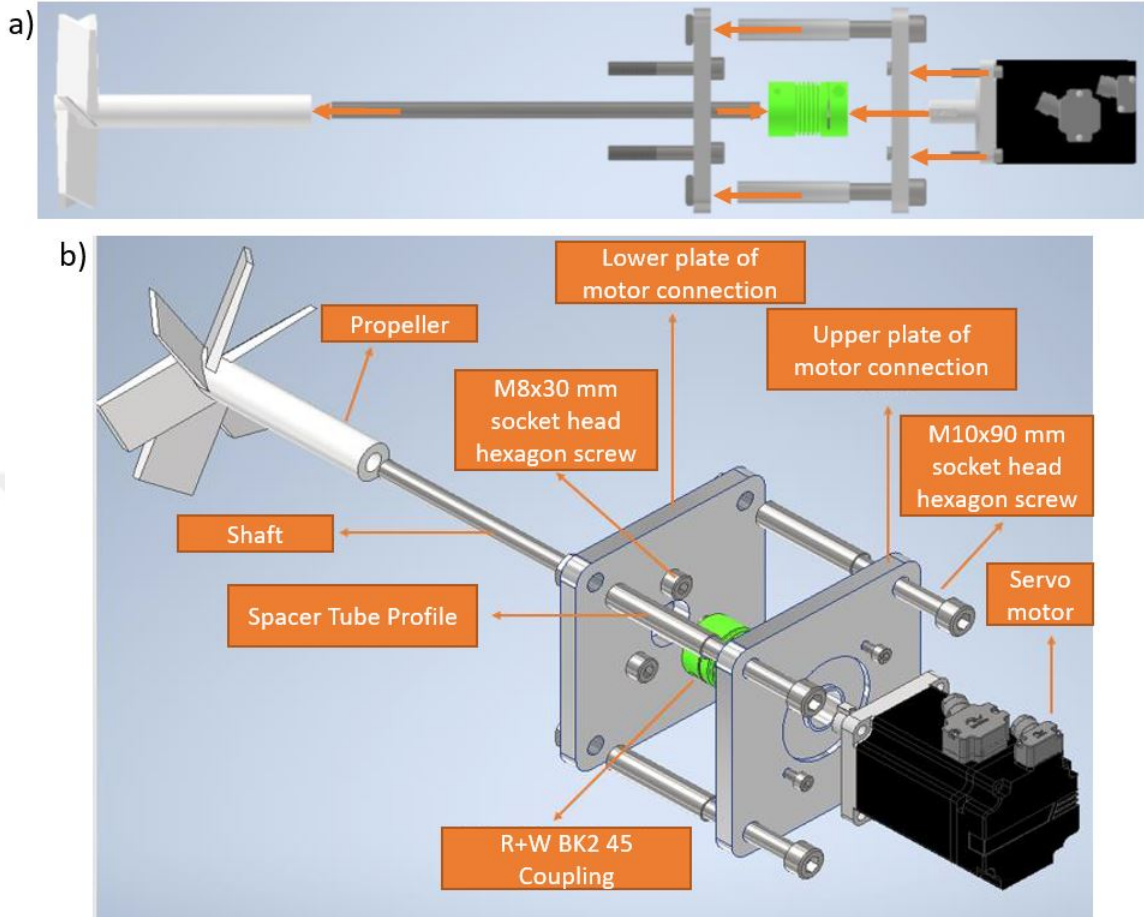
Connection between servo motor and propeller; a) Schematic of the assembly of moving parts, b) Parts of the assembly
